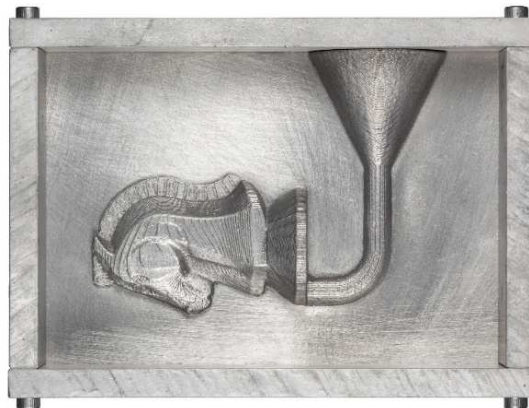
Aluminum mold with a model of a knight chess figure for the production of sand casting molds.
